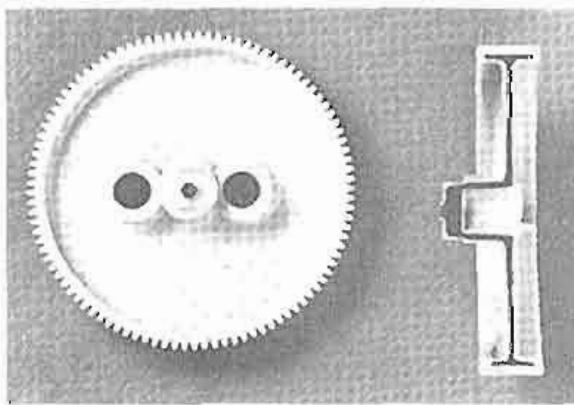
A plastic gear with a solid outer skin and a rigid foam core. (From American Machinist.)
